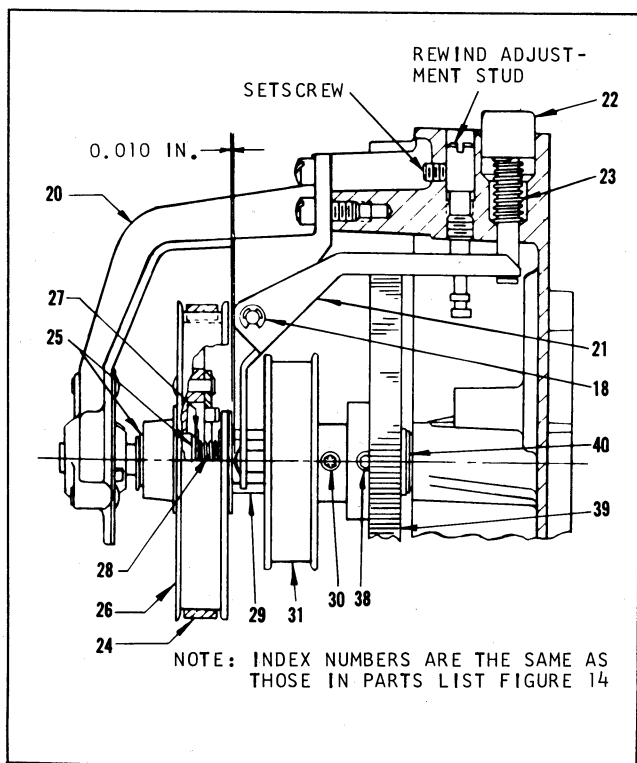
Figure C. Upper Sprocket Gear and Clutch Parts Assembled
